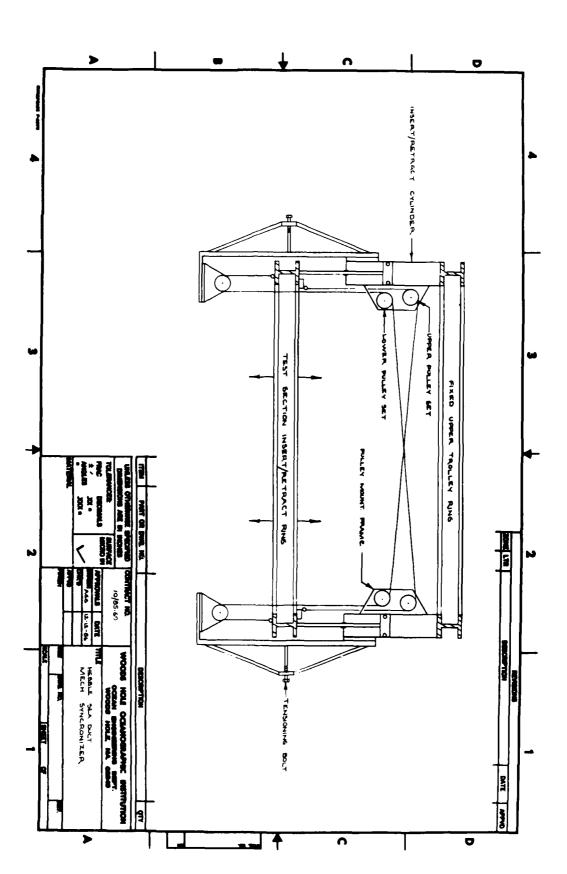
a. Mechanical Cable Synchronizer Assembly.
